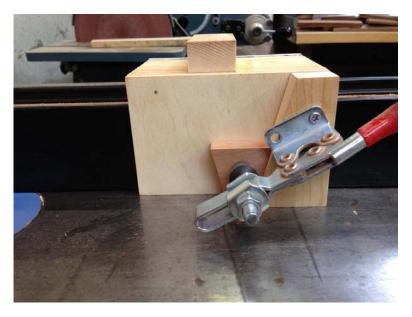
The segment clamp was added. I used a push stick to hold down the segment when I pushed the fixture through the blade. I recommend that, for safety, you do not pull the fixture back through the blade. Instead, pick the fixture up off the fence and put it back down in its starting position in front of the blade.
